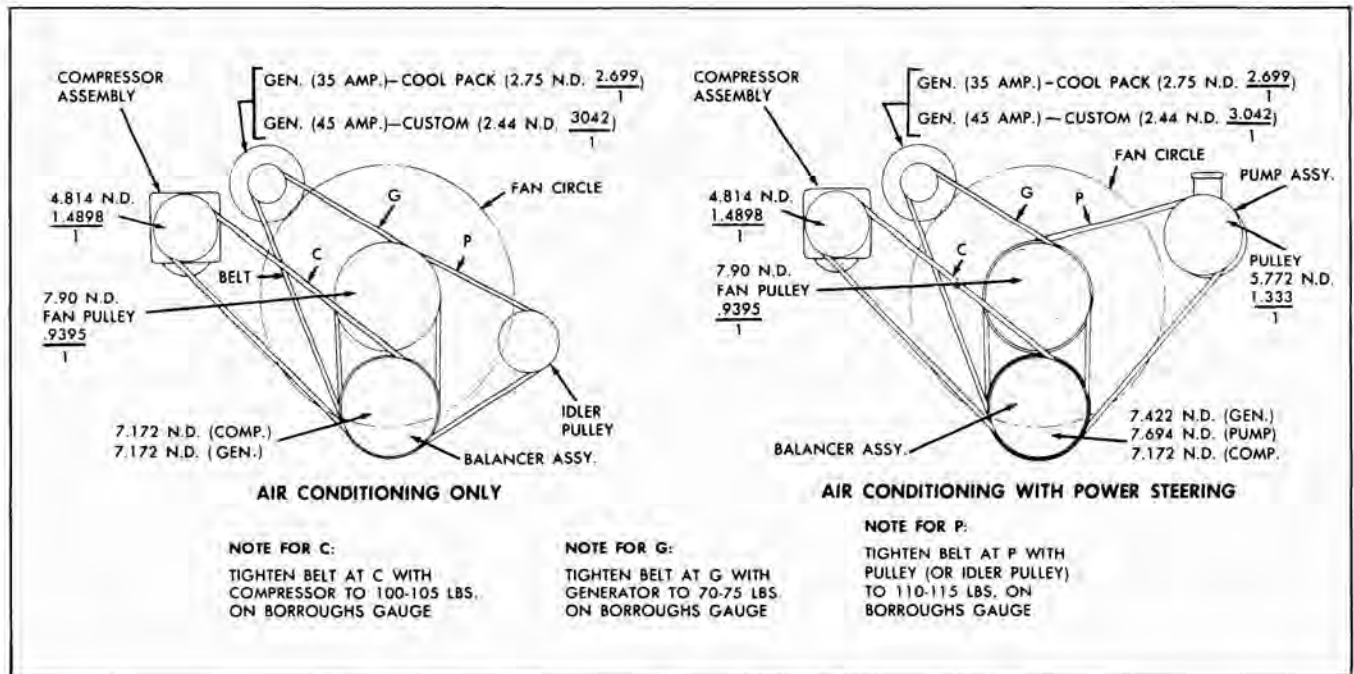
Pontiac Engine Drive Belt Combinations
